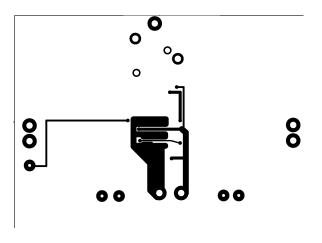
Recommended IAP PC board layout: bottom-side layout
